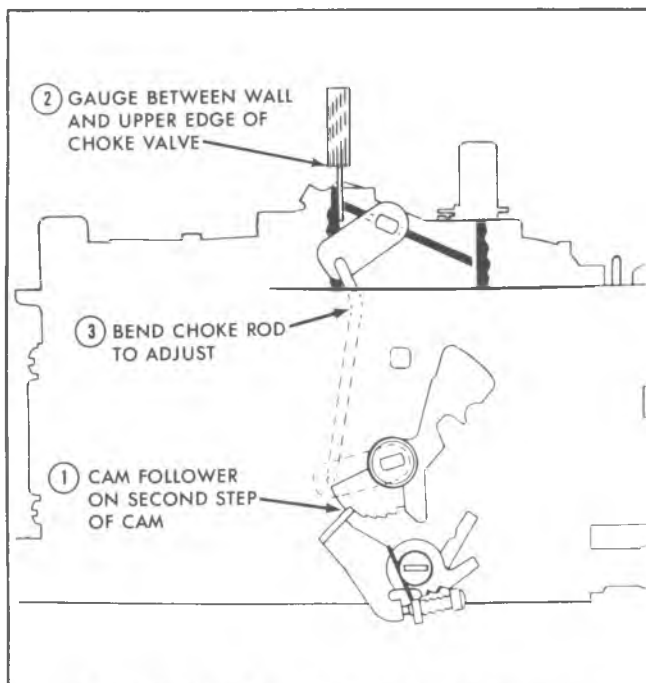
Q—Choke Rod (Fast Idle Cam) Adjustment
